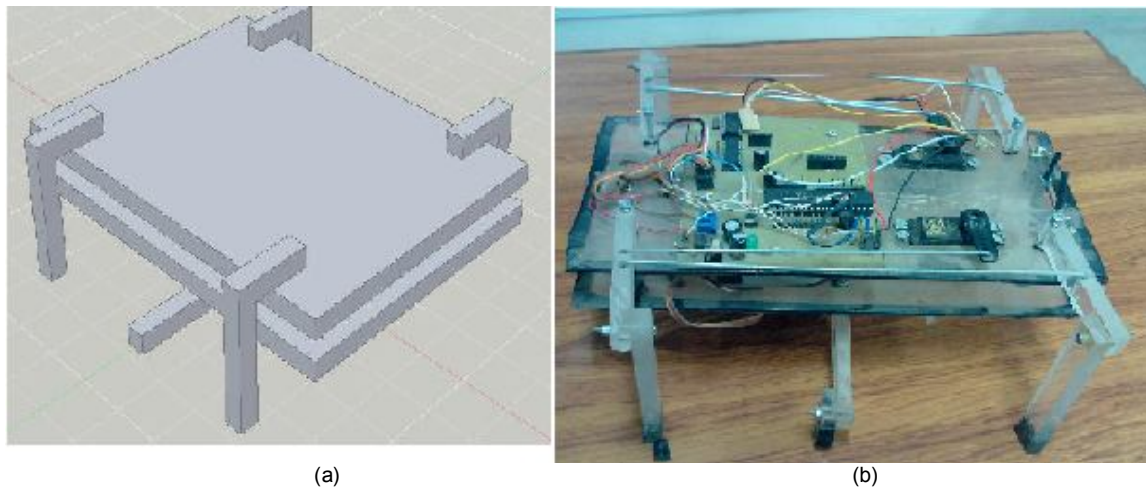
Wander Hexabot (a) CAD model (b) Fabricated prototype
